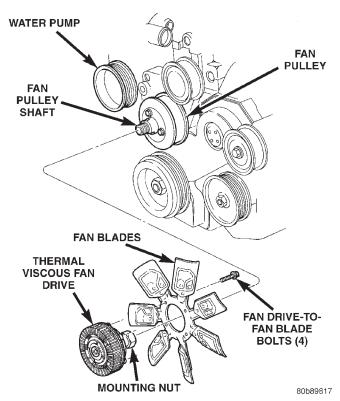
Thermal Viscous Fan Drive and Blade Assembly
